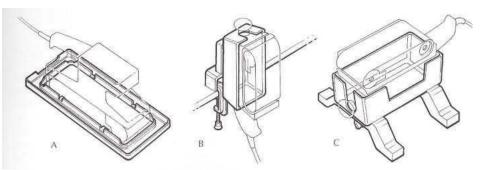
Attachments for sanders: a) sanding frame for a belt sander; b) clamps to fix belt sander in a vertical position; c) horizontally
